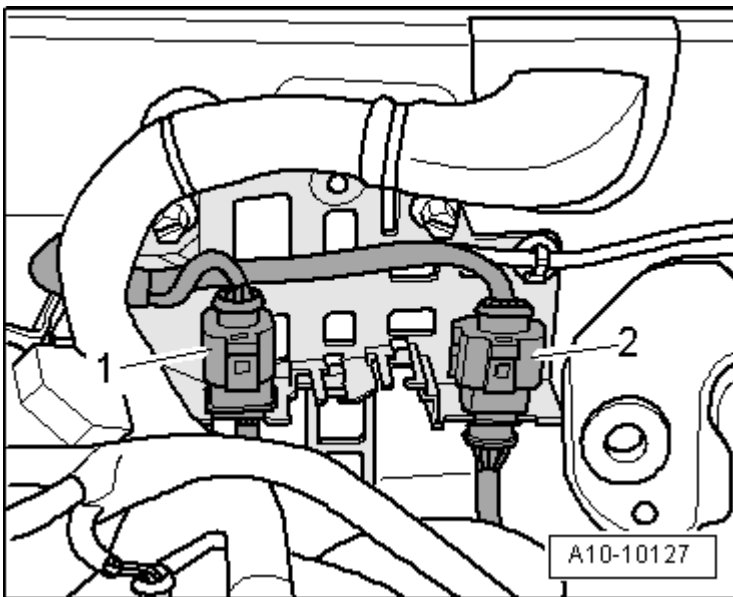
Identifying Electrical Change-Over Valve Connector, Intake Manifold Brackets & Dipstick Tube
